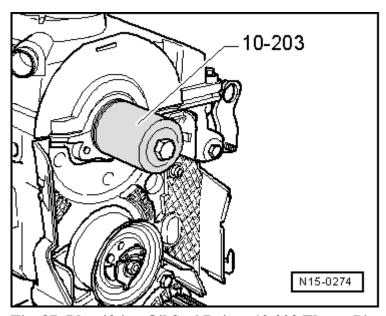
Identifying Oil Seal Driver 10-203 Thrust Piece And Bolt
